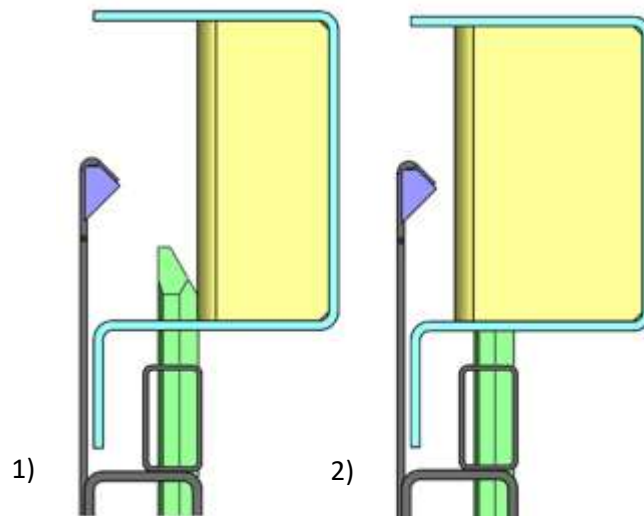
Top side rail stiffener options. 1) On the plane of the side wall pin lock (green); 2) on the plane next to the side wall clamp (purple)
